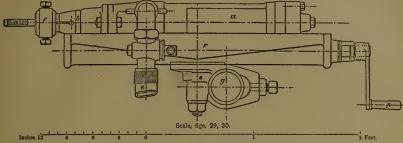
Side Elevation of Darlington's Rock-Drill.-Scale 14
